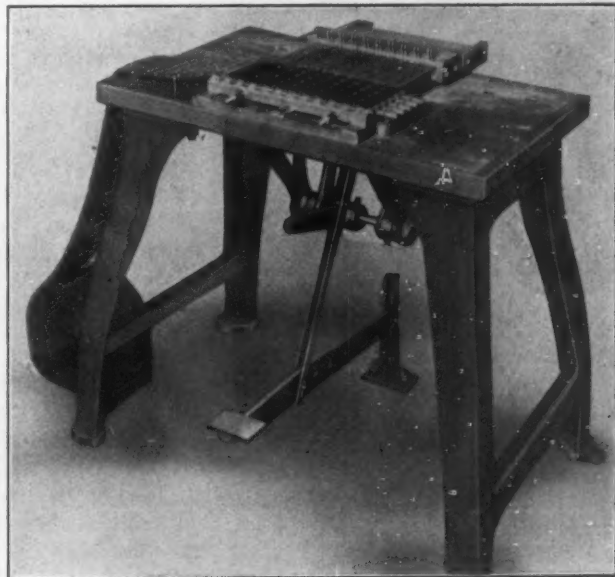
ASSEMBLING MACHINE, SHOWING HOW A 5-INCH BELT IS ASSEMBLED
